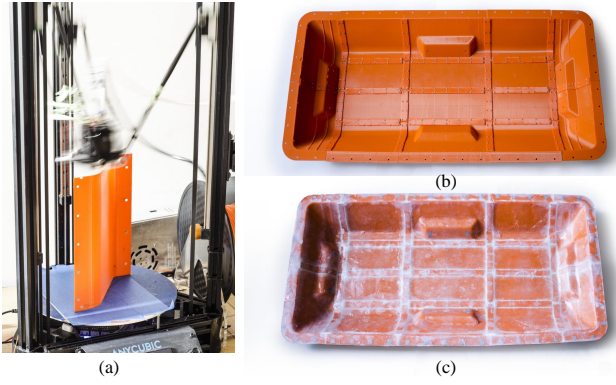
Manufacturing process of the boat hull. (a) Printing one piece; (b) connecting all printed pieces to form the hull; (c) sealing the hull.
